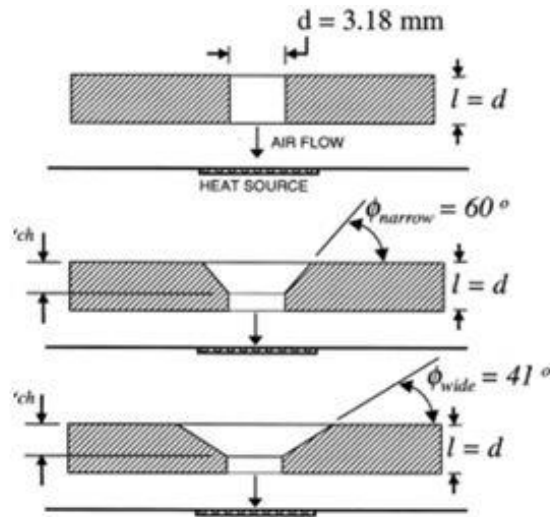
Nozzle chamfer depth and chamfer angle [48]
